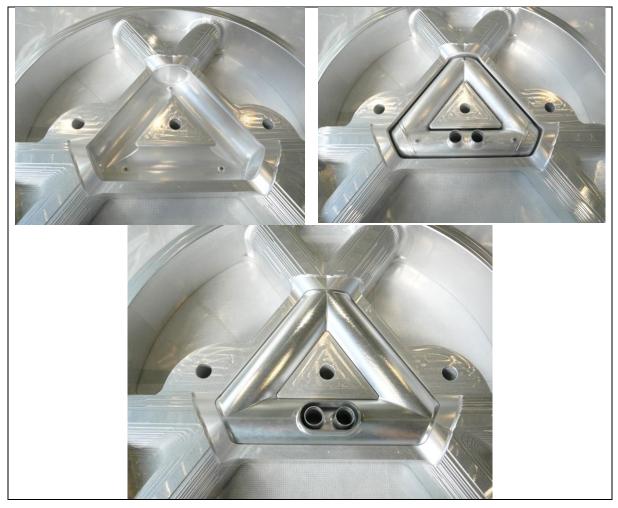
Assembly of the vacuum vessel with the hydrogen vessel inside
